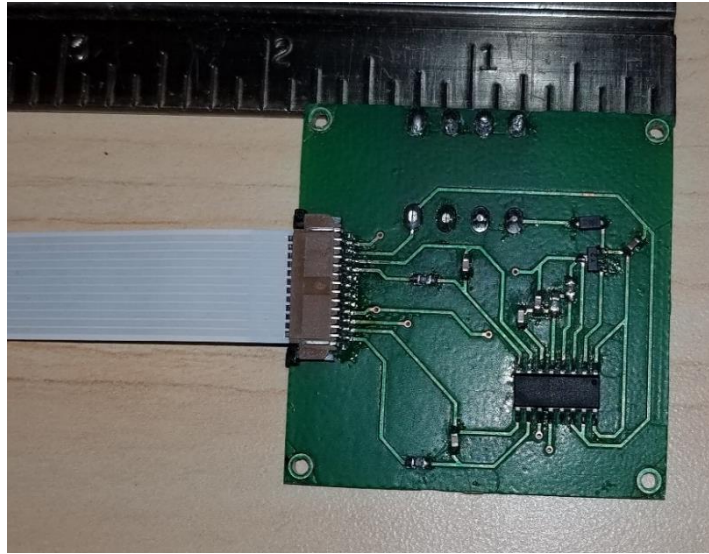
Bottom Face of the Assembled Mounting Base PCB with the HX711
